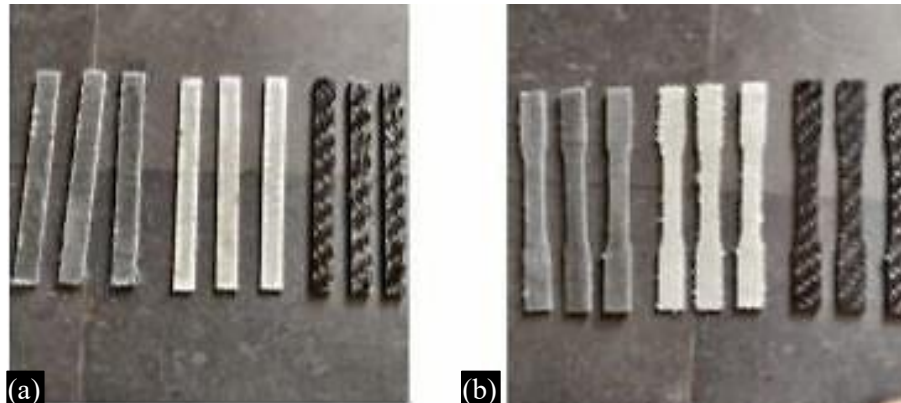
(a) Prepared Specimens (b) Specimens as per ASTM standards.
